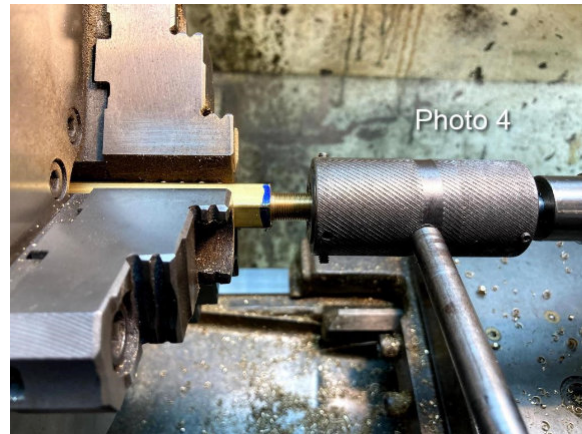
show tapping the end of the bonnet 1/4-40 thread to the bonnet cap. Which I made from 5/16-inch brass hex stock.
